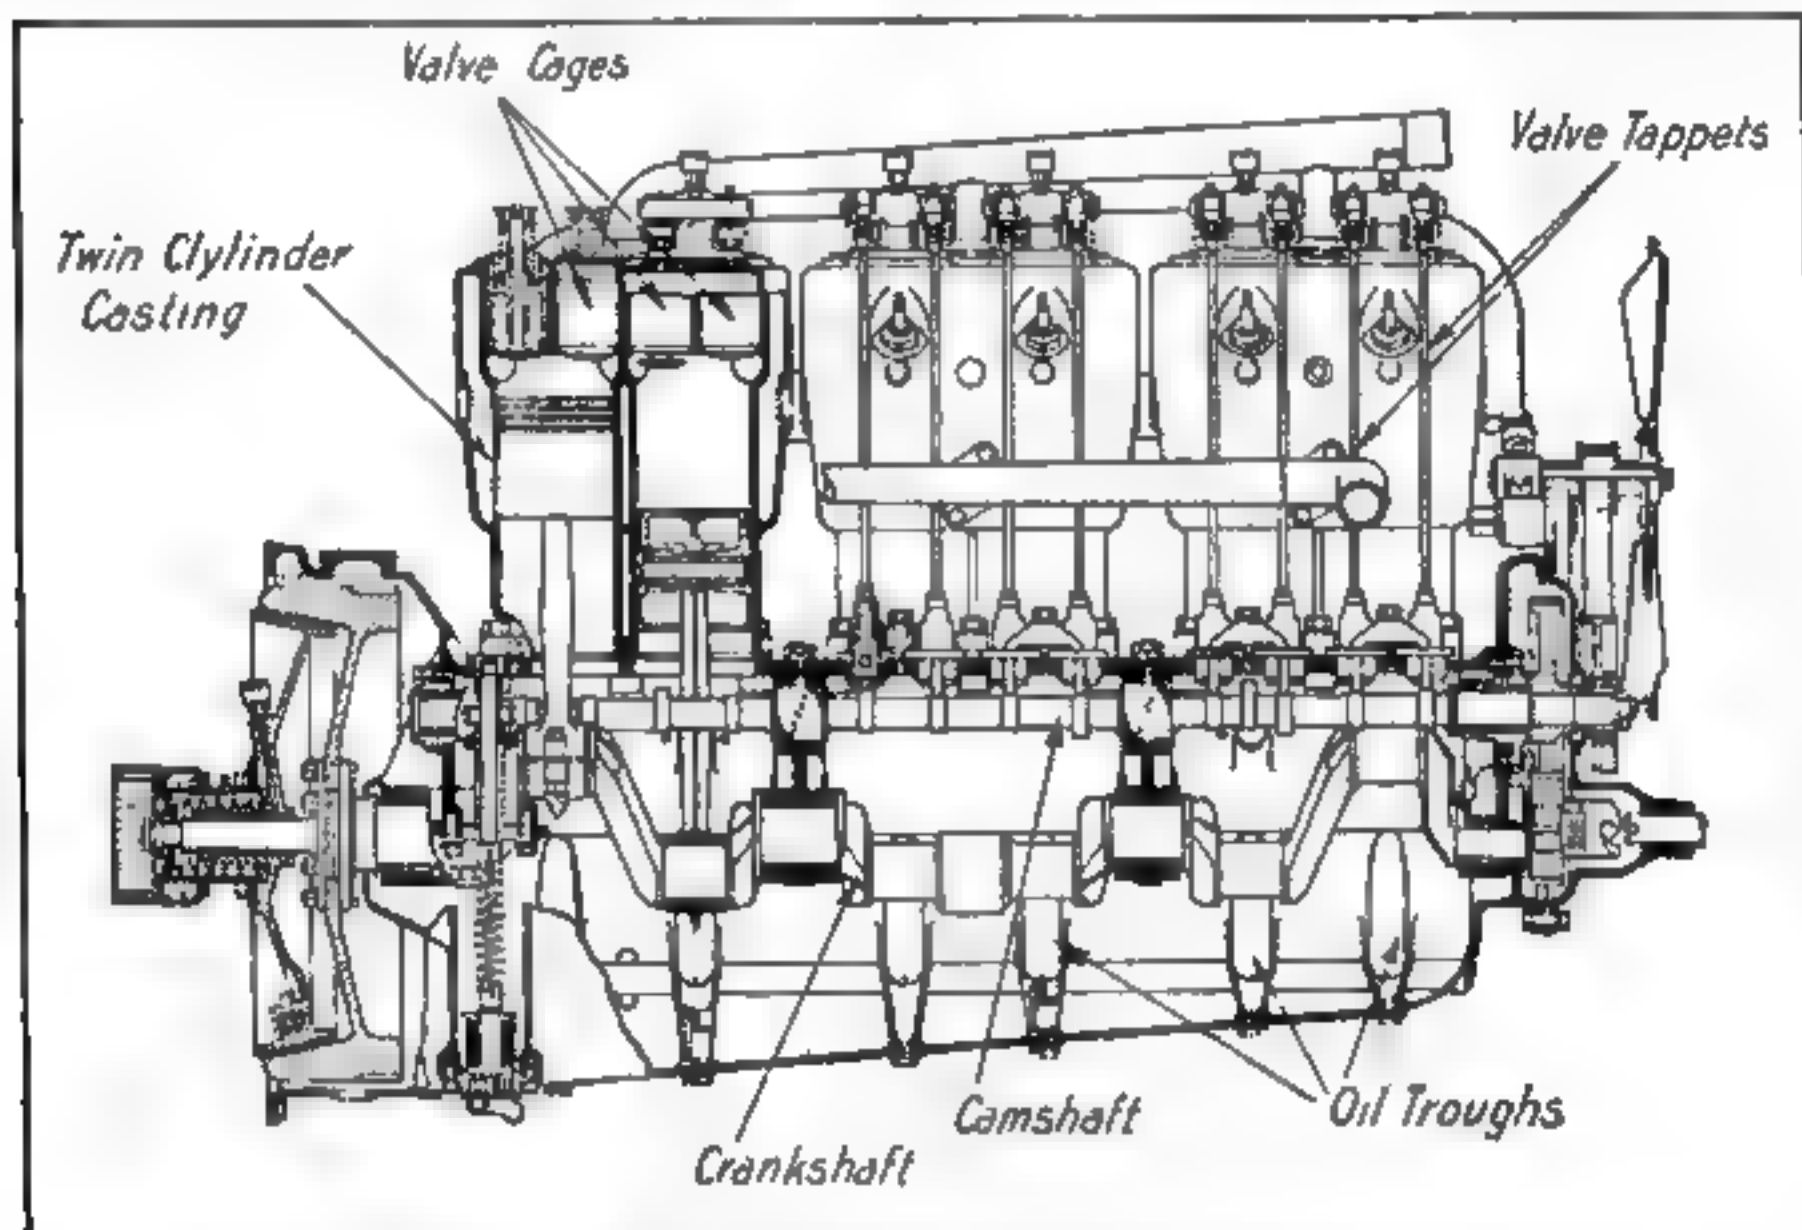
A part sectional view of Buick Motor, showing method of valve mounting in easily removable valve cages
